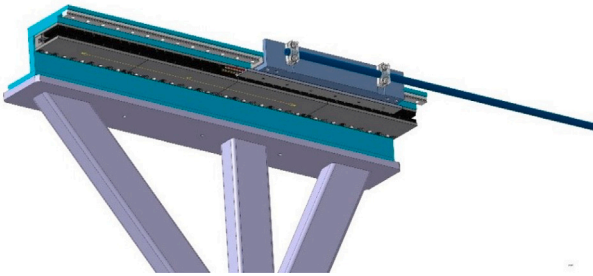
Stainless steel plate hosting the permanent magnet yoke and the linear motion ball-type rolling guide.
